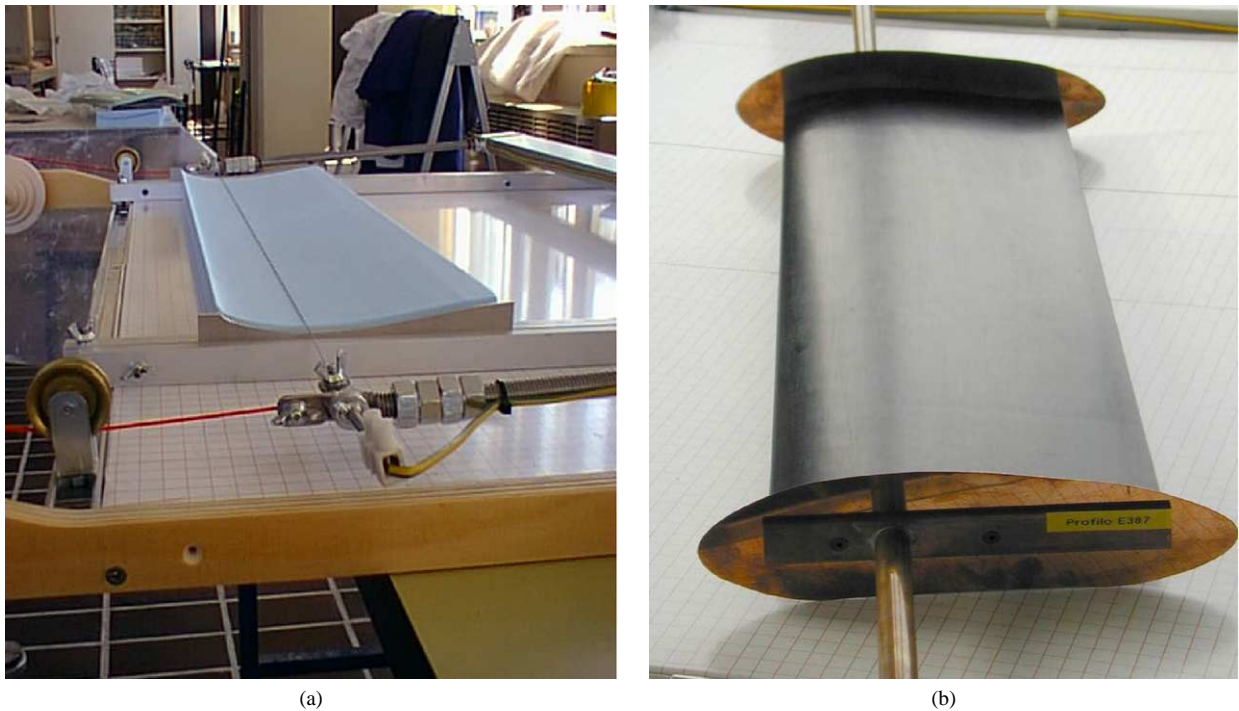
Machine for cutting the molds (a); Metalized wing profile (b).
